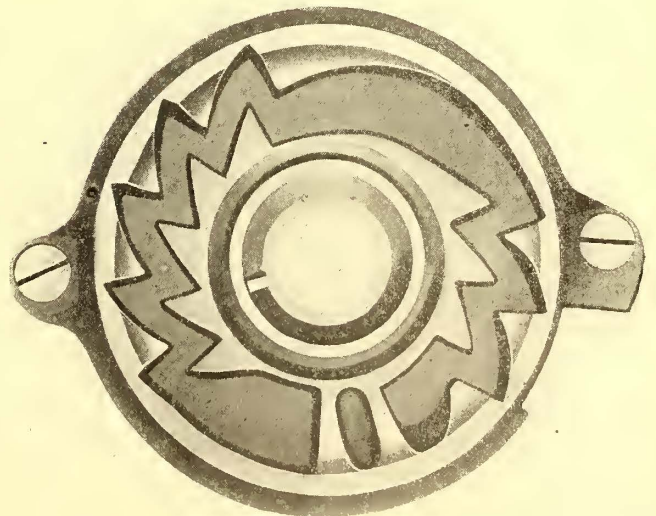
LOWER PART OF AUTOMOTONEER, SHOWING ZIG-ZAG GROOVE
